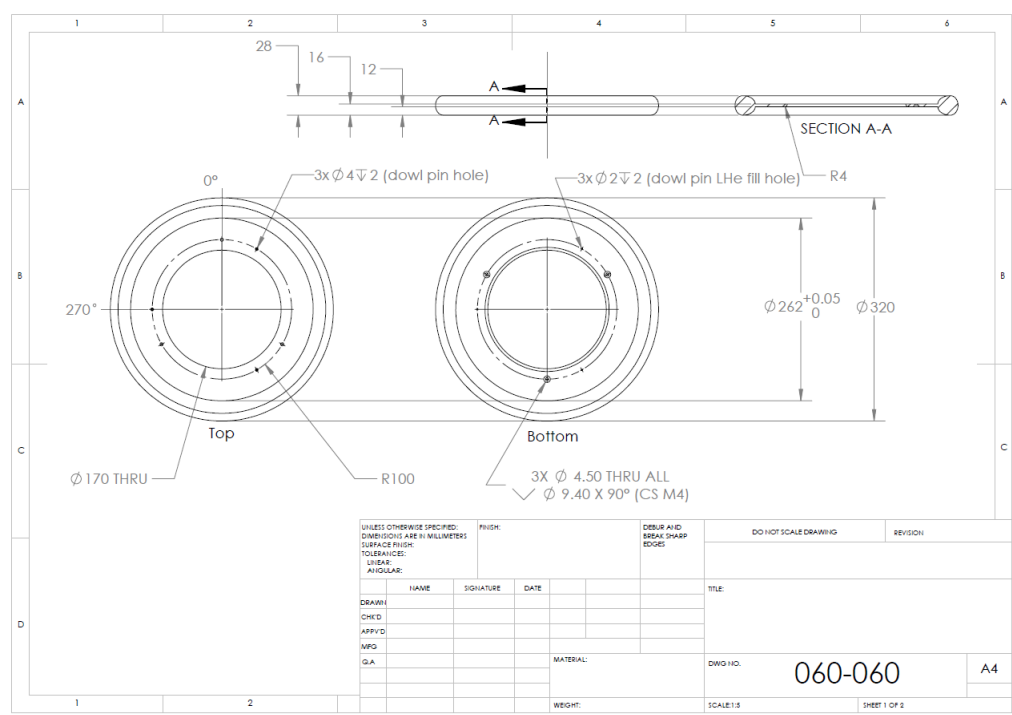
Drawing of the HV electrode corona ring. The spacer plates are bolted into this ring and aligned using dowel pins.
